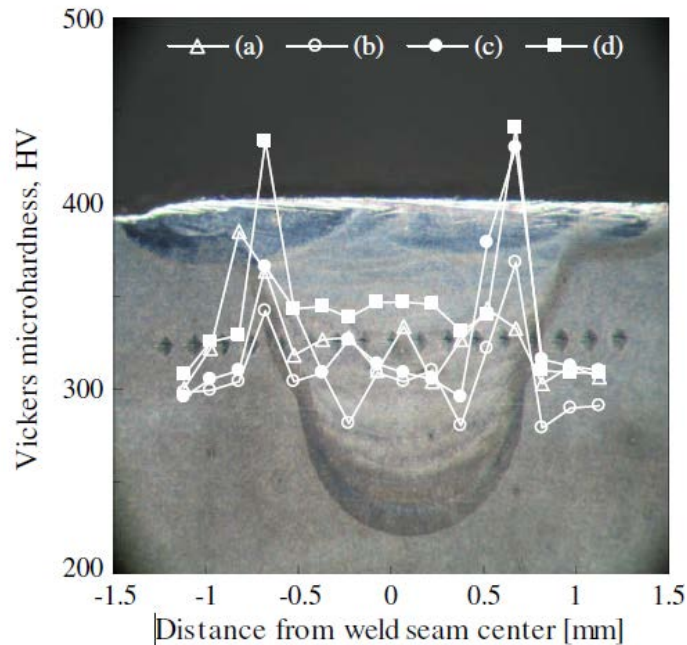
HARDNESS PROFILES IN LASER WELDS [54]
